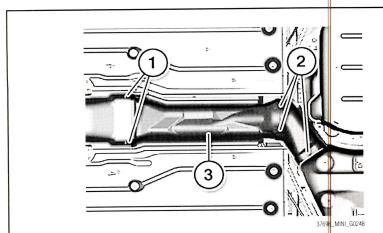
Release sheet nuts (1), screws (2) and remove heat shield (3)
